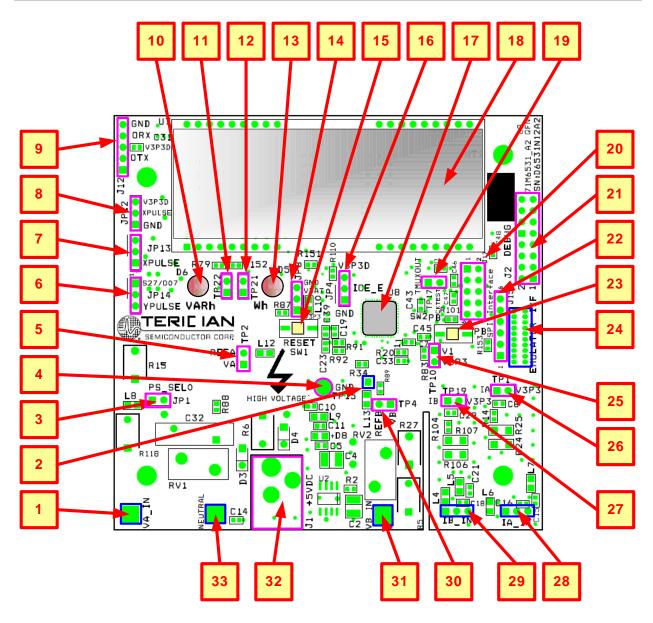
71M6531N12A2 Board Connectors, Jumpers, Switches, and Test Points
